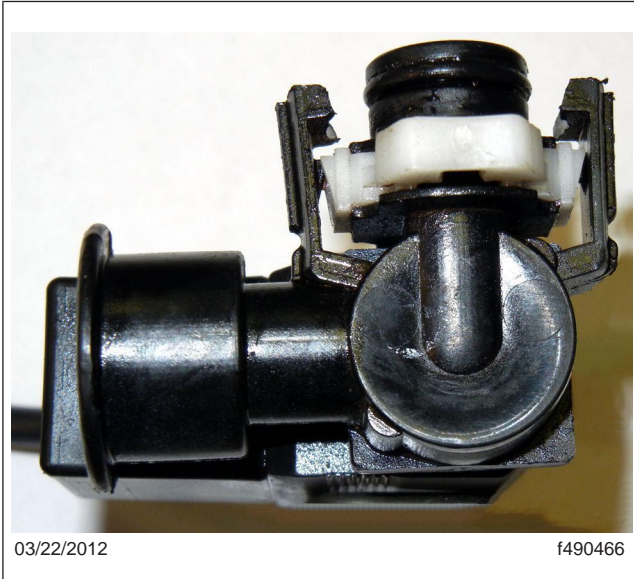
, 7-Watt Solenoid Valve ($20\pm 1 \Omega$)
